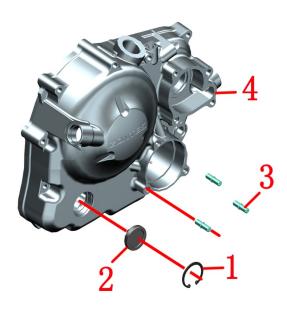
RIGHT		Remove Right Crankcase Cover Assembly 6	CHK
